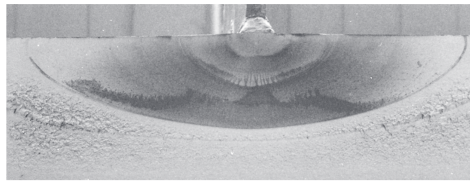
Fracture surface of a fatigue crack [4]
